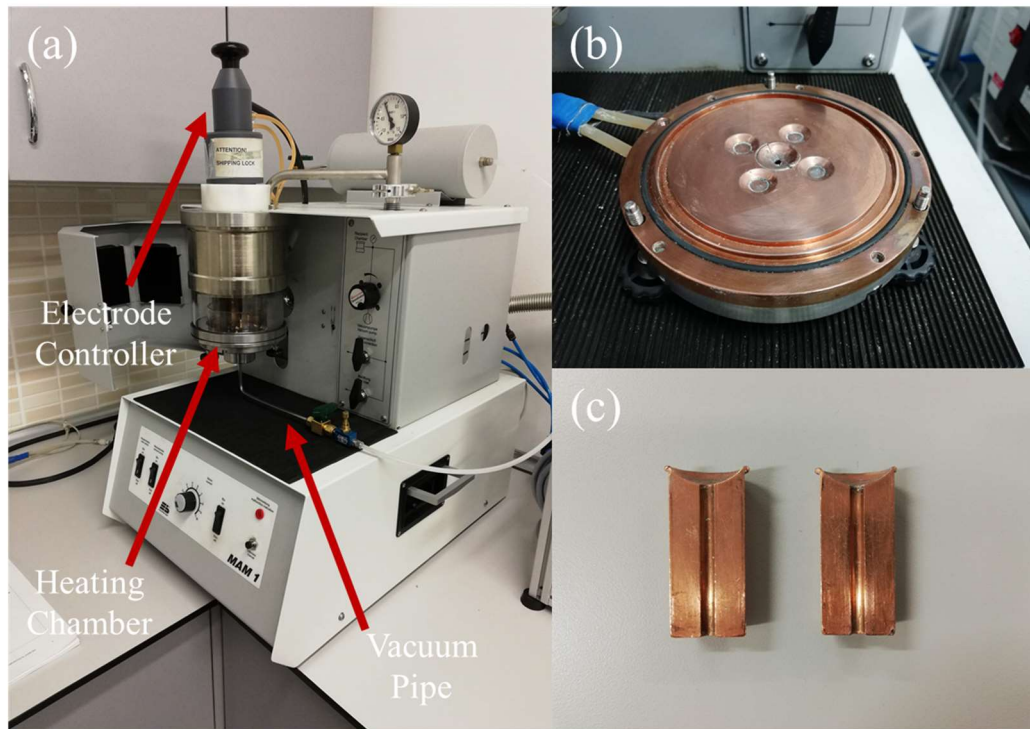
1. (a) Edmund Bühler MAM 1 vacuum-arc-melting device, (b) copper plate, and (c) copper mold used for vacuum suction casting.
